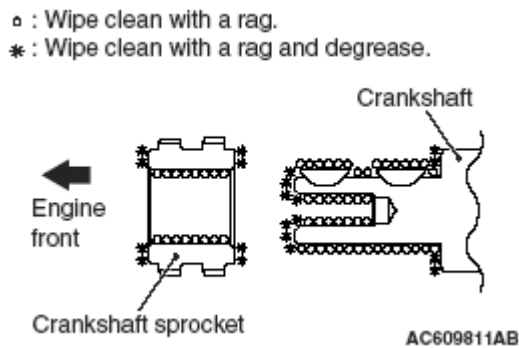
Wiping Dirt Off Of Crankshaft Sprocket And Crankshaft
